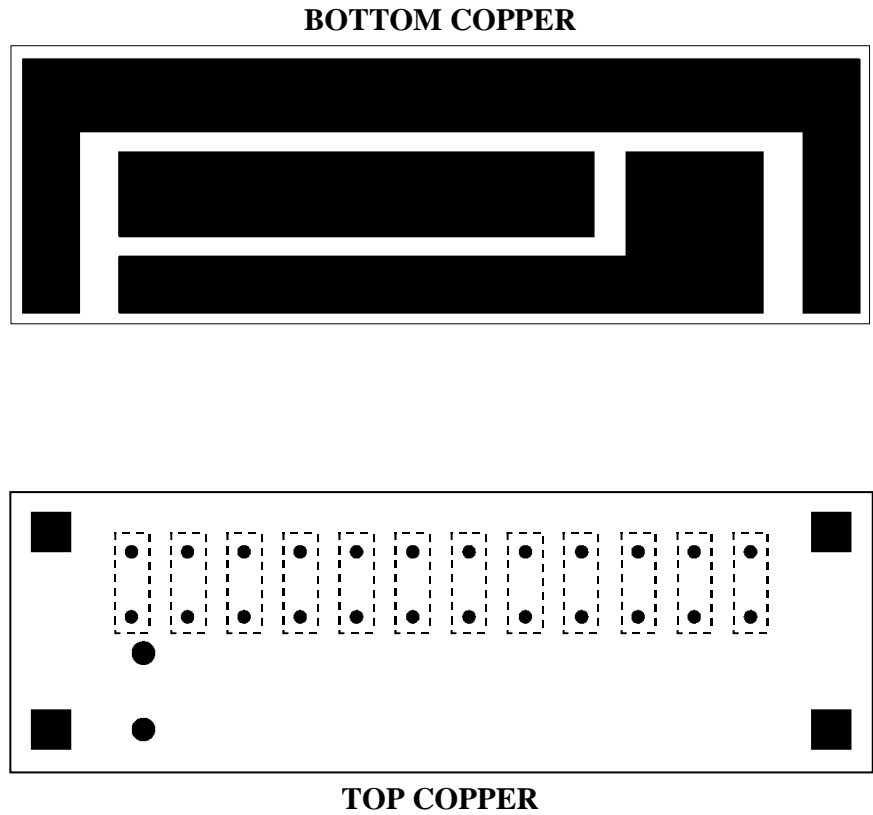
AC LINE DELAY BOARD (ASSEMBLY A9)
